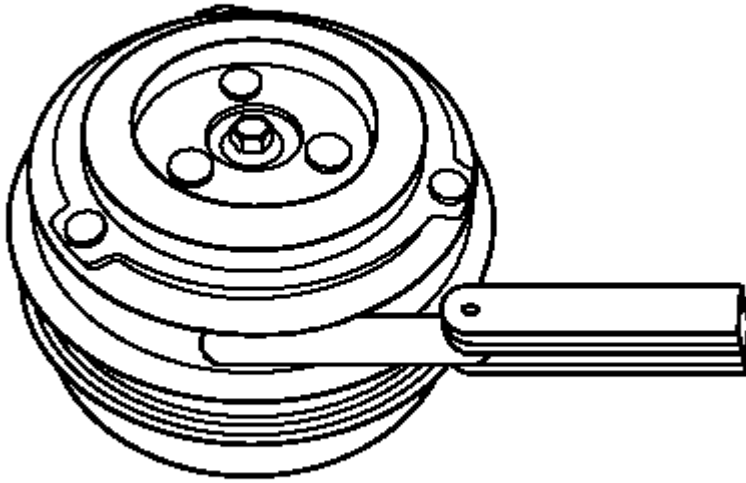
Measuring Air Gap Between Pulley And Drive Plate
